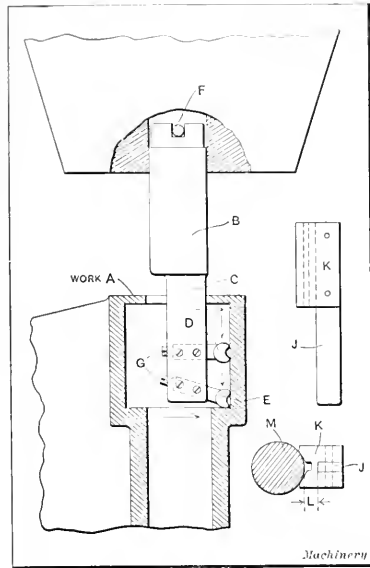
Bar for Undercutting, Facing and Boring in the Vertical Turret Lathe and Gage used in setting Tools
